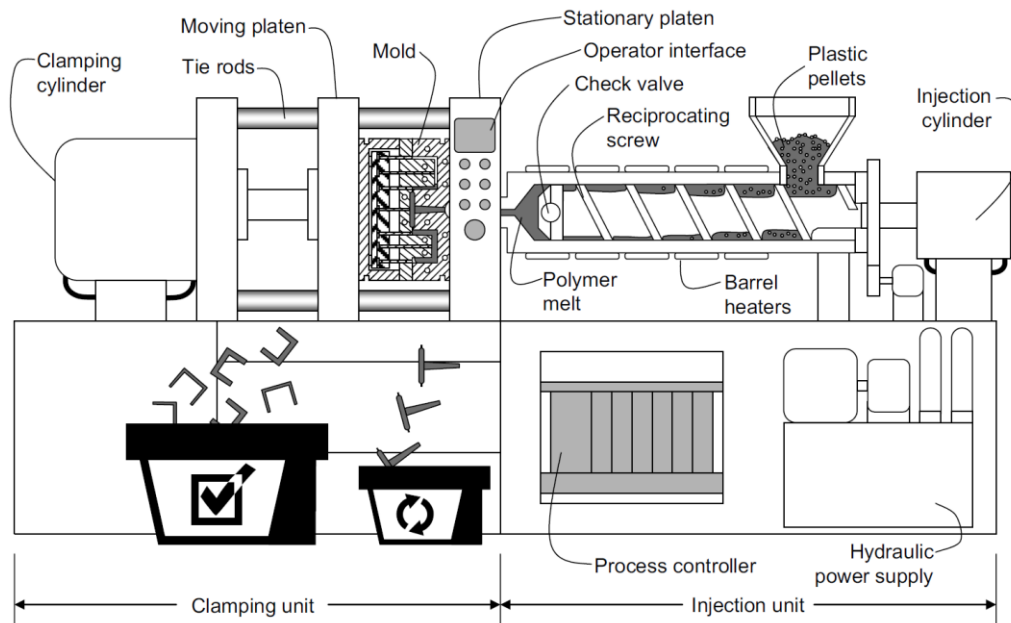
A representation of the injection molding machine (Kazmer, 2007)
